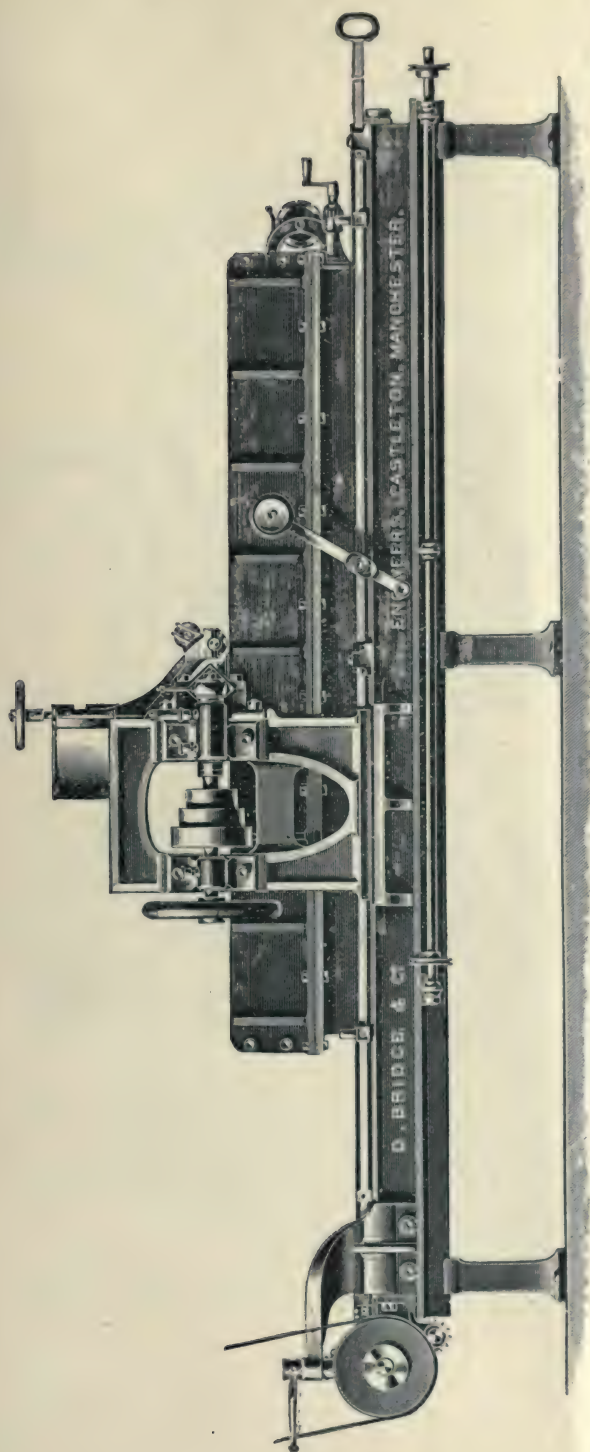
Bridge's improved horizontal sheet cutting machine specially designed for cutting fine sheets of purest Para rubber from blocks first made by hydraulic pressure, in suitable moulds, and capable of cutting up to 120 sheets per inch, in thickness, consists of box 9 feet long, 22 inches wide, with movable bottom, lifted at every cut by a suitable worm-wheel and screw, operated by handle, at one end, with index. This box is caused to slide backwards and forwards, on its cast-iron bed by a screw, worked by bevel gear at one end, with quick return motion and fast and loose pulleys. To prevent water splashes, the bed is fixed inside cast-iron tray, supported by standards, and a shaft with rope pulley secured to same, to run the table or take bottom of box down by power if desired. An automatic, adjustable stop prevents box travelling too far. The knife or cutter is fixed on an improved holder to which a slight motion is given by eccentric, worked at a considerable speed from a shaft driven by three-speed cone pulley, and fitted with balanced fly-wheel, the whole being firmly supported by a strong fixing on bed of machine. A pressing roll, supported by bracket, in adjustable vertical slide, is laid in front of knife, and a small batching roll is driven off same by contact. A water drip can is fixed on bracket, supporting knife, so that a stream of water meets the cutting edge of same to facilitate cutting.
